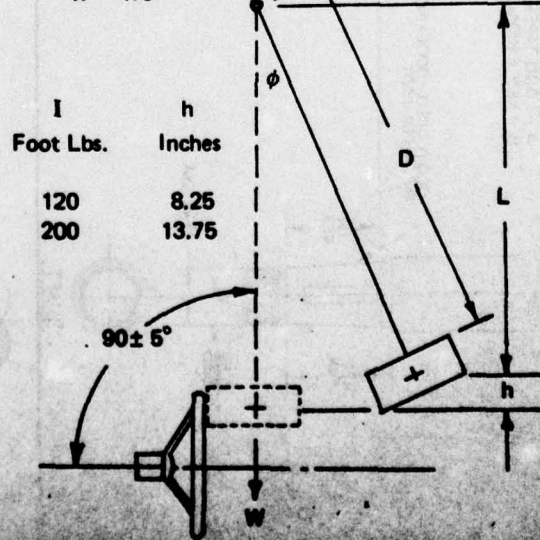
STEERING WHEEL IMPACT TEST FIXTURE
